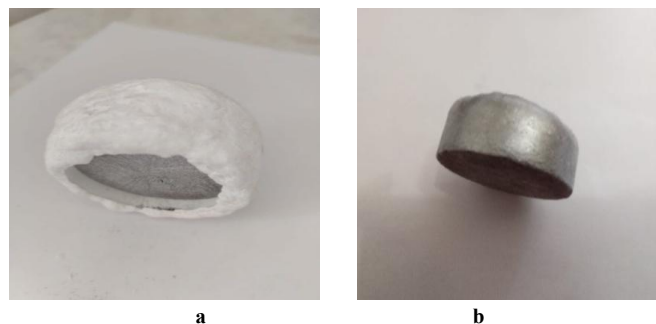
Experimental specimens after casting: (a) ceramic shell mold containing the casting after solidification; (b) experimental casting after removal of the ceramic shell mold
